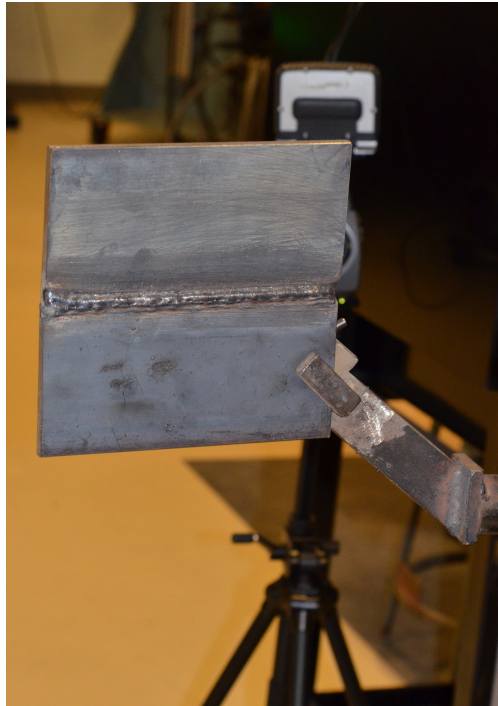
Horizontal Groove Weld, 2G Position
